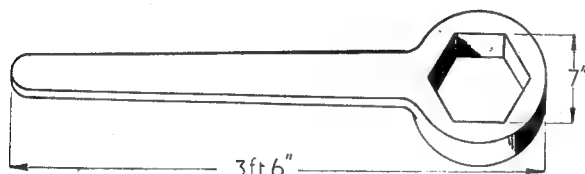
Spanner for the main pump-rod nut, No. 1 engine
